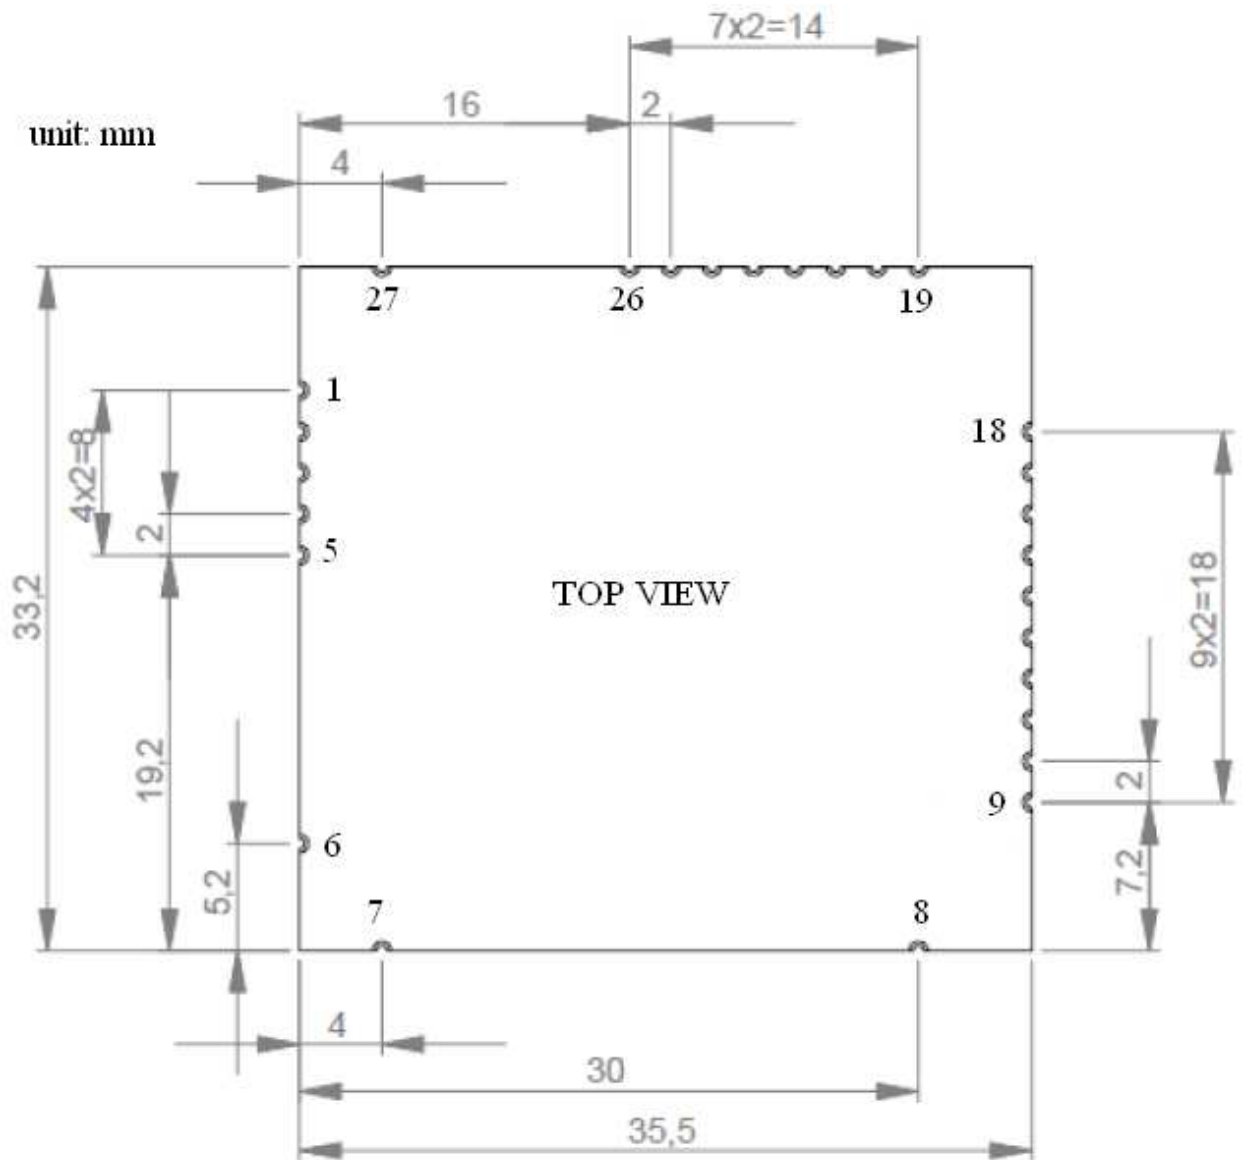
Overall and Connection Dimensions of GL8088s Receiver.
